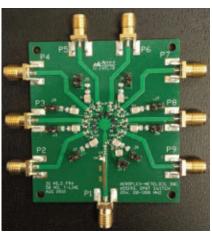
Package on PCB with RF choke, DC blocking capacitor, bypass capacitor, resistor and power supply.
